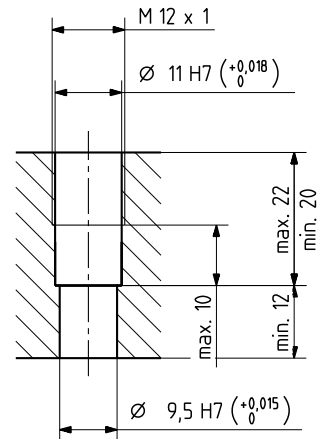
Mounting bore for Type 4073A.../4075A...
